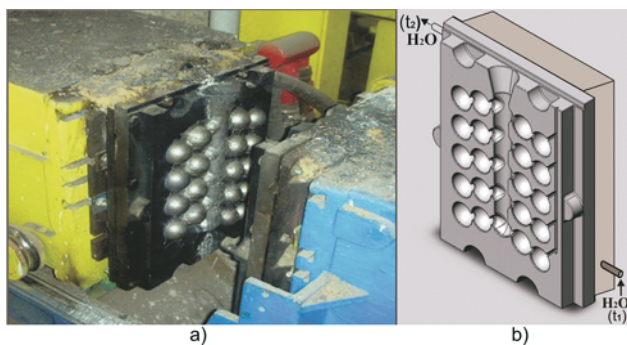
Flotation balls-casting in metal molds: a) released mold shells in the drip caster b) 3D solid model of the mold shell
